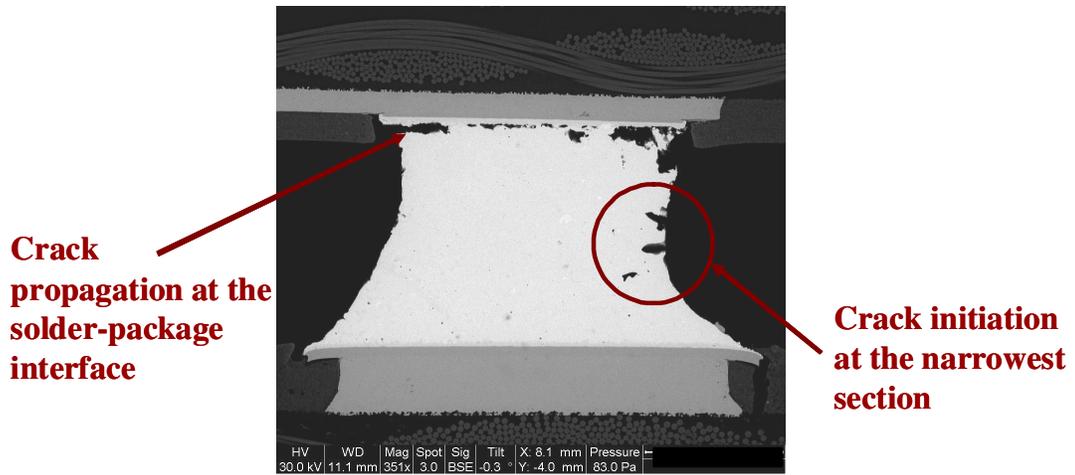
Hour-glass shaped solder joint with partial crack on package side Sn based finish SAC305 solder Board1 256 I/O BGA - Package A [CTF=1697] (courtesy: CALCE)
